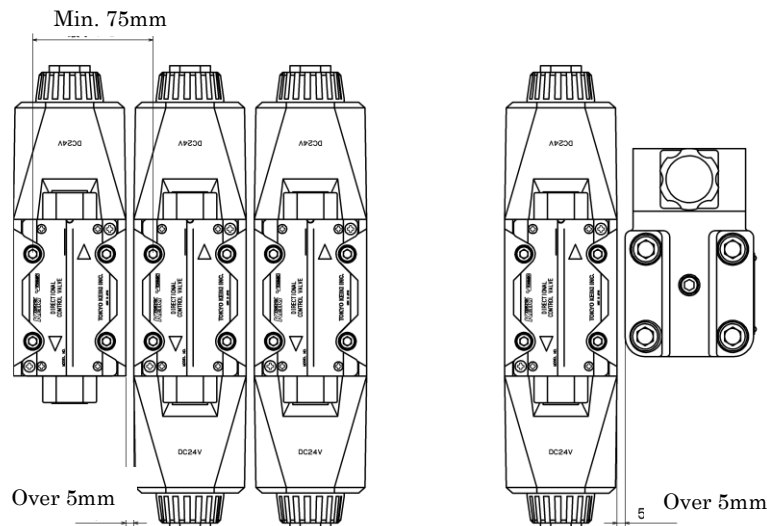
Change of Side Surfaces from Machined Surface to Casting Surface
